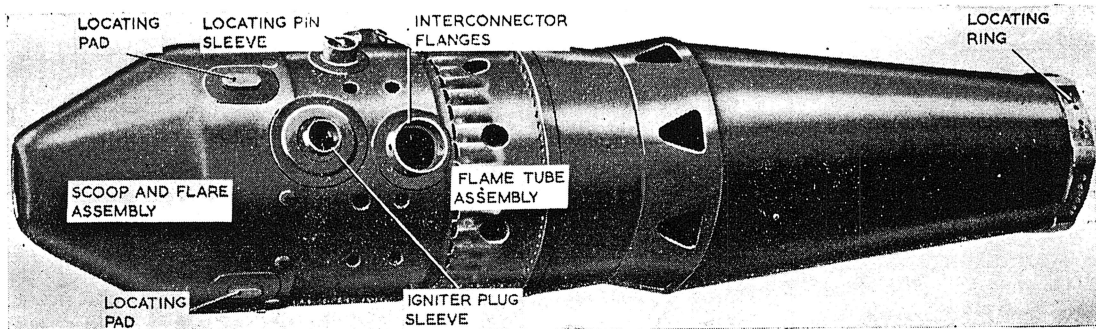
Flame tube assembly fitted to Goblin 3, (Mod. 820)
